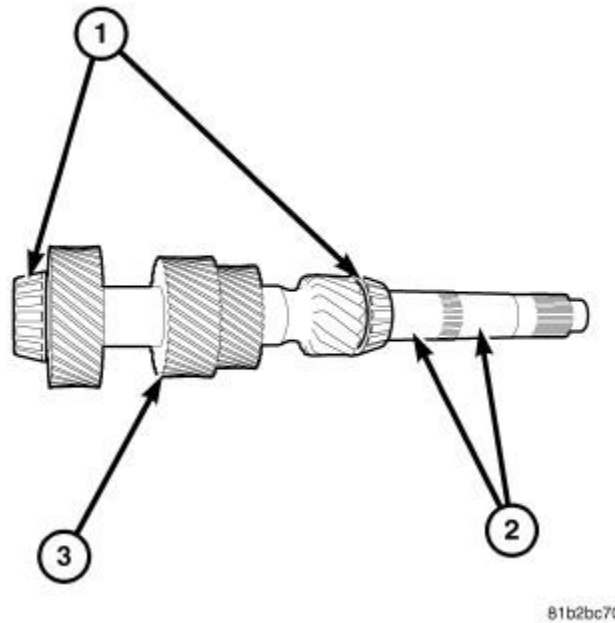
Roller Bearings, Surfaces & Gear Teeth
